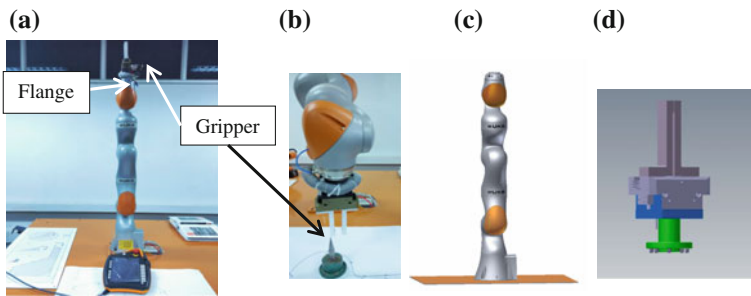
Installed and CAD model of the robot with its custom designed gripper. a Installed KUKAiiwaR800 robot. b Gripper and point taken for calibration. c CAD model of the robot till flange. d Schunk gripper with custom designed finger
